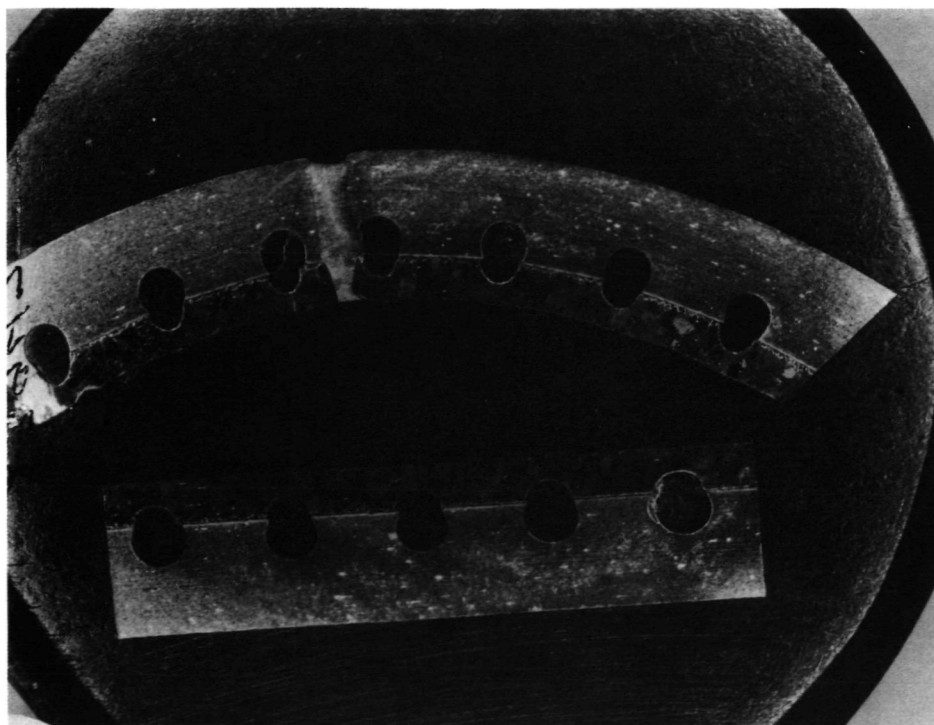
Electron Beam Welded Bend Test SAMPLE ENB-3
